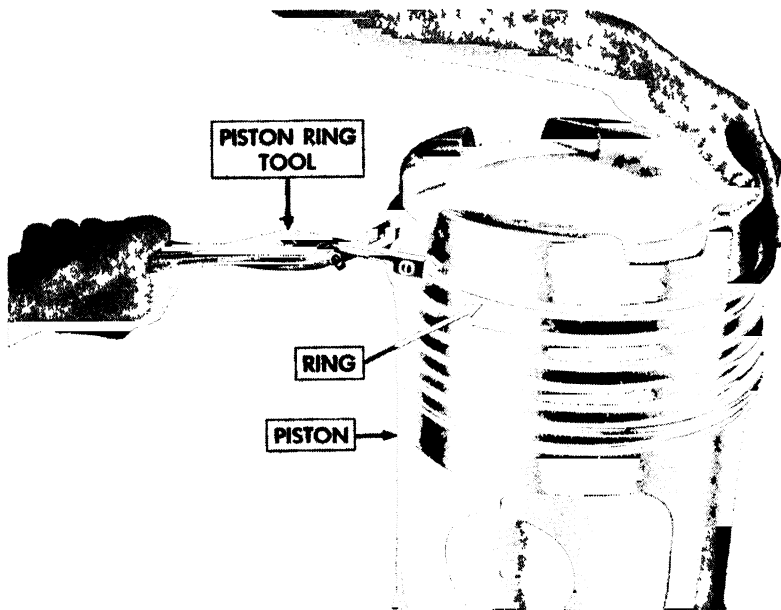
Installation of piston rings, showing use of piston ring tool.
